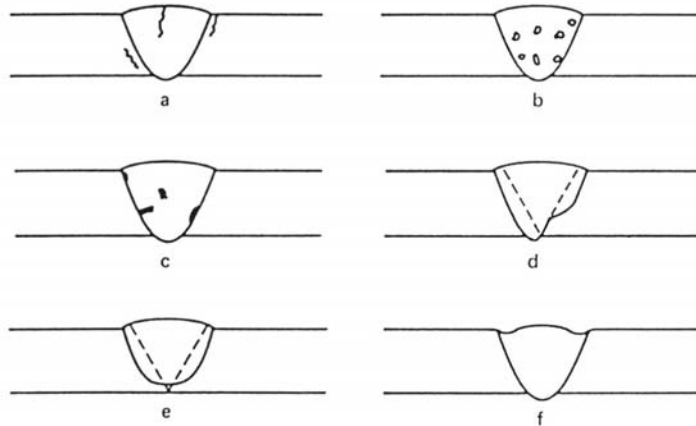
Weld defects: a) cracks; b) pores; c) inclusions; d) lack of fusion; e) insufficient weld penetration f) undercut.
